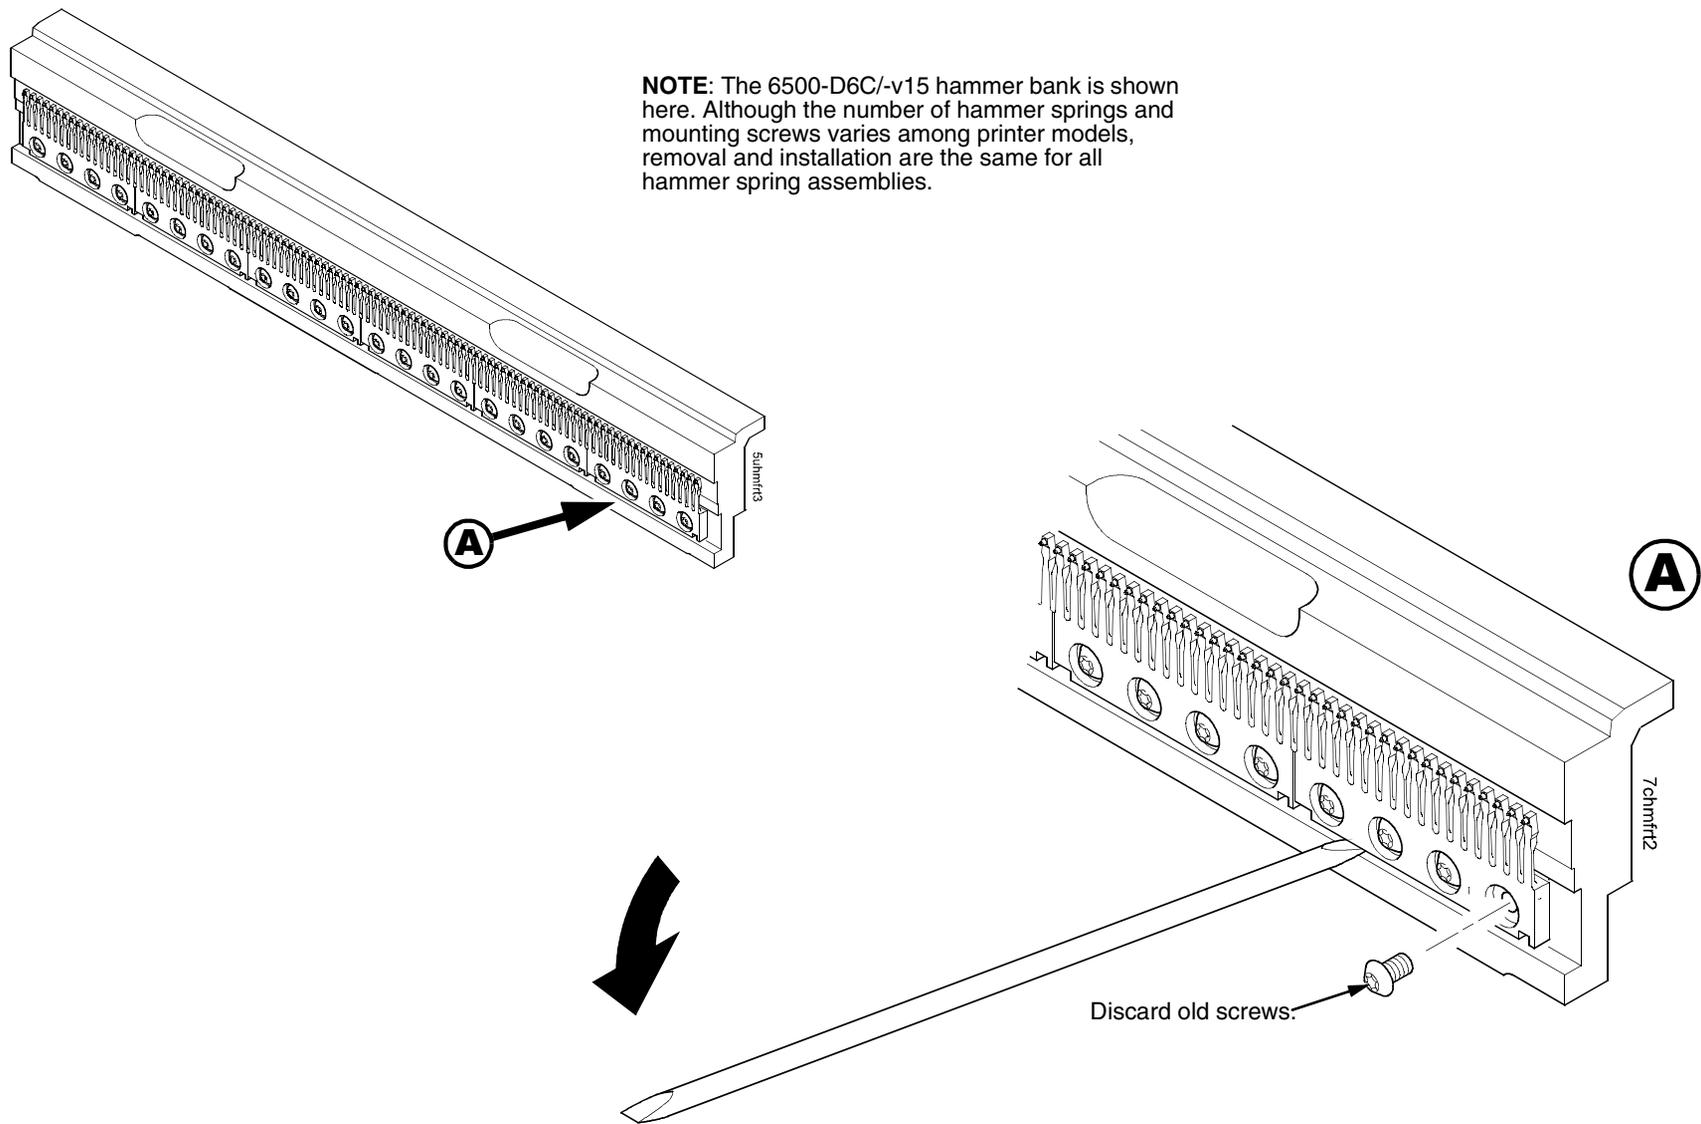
This figure shows how to remove a hammer spring assembly from the hammer bank.
